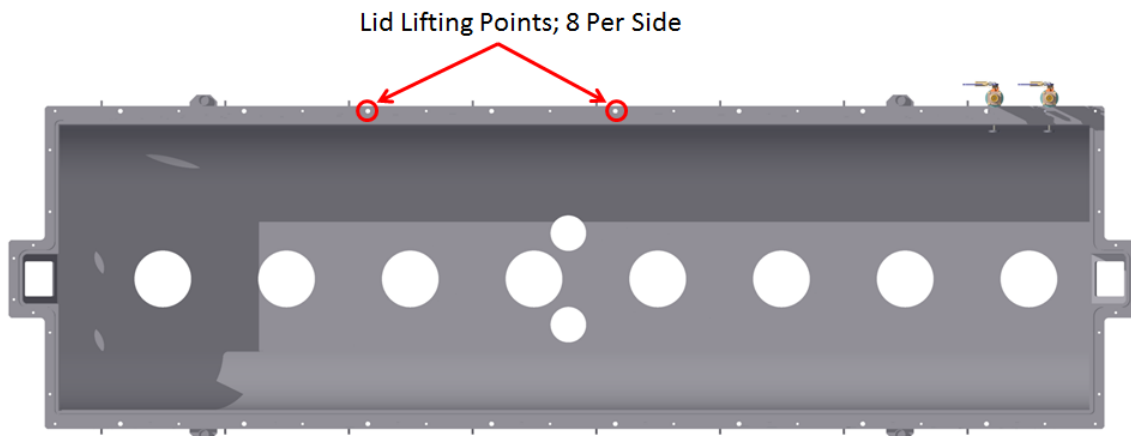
Locations for lifting the box. Each side of the box has 8, 1" diameter, clearance holes for lifting.
